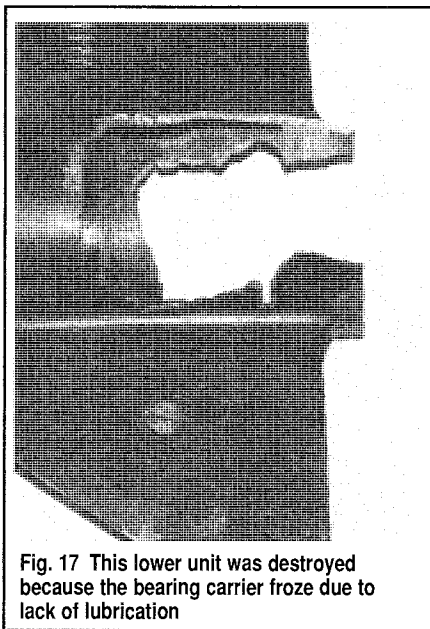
This lower unit was destroyed because the bearing carrier froze due to lack of lubrication
